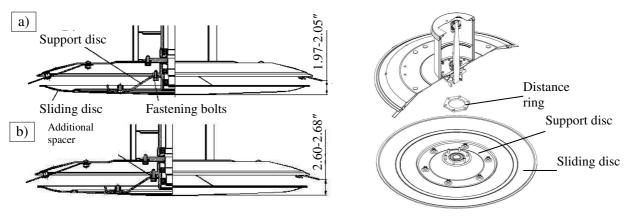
Adjusting the cutting height by fitting or removing the distance ring
